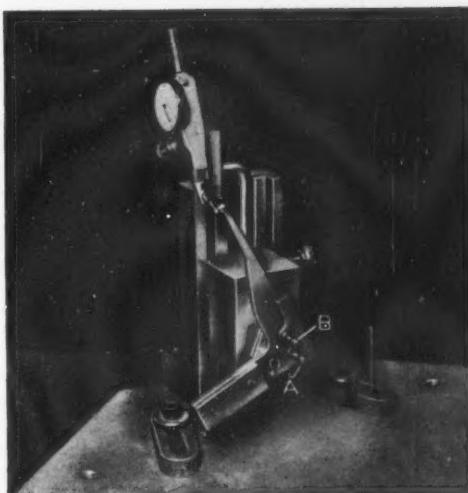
A View of the Gauging Head, Showing Details of the Design, and the Contact Pins A and B
